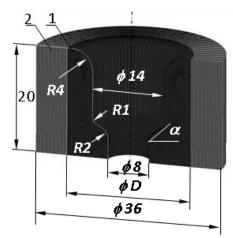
Scheme of the die with dimensions (1 – die insert, 2 – compression ring)
